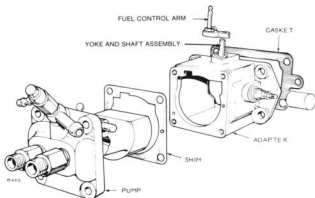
PUMP AND ADAPTER ASSEMBLY
